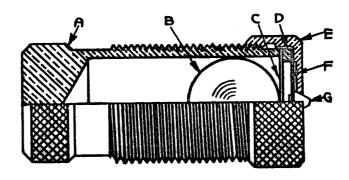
CONTACT ASSEMBLY FOR INDUCTION CUP RELAYS. (K-6077069)
